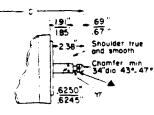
Threaded-shaft dimensions for General Electric 40-size TEFC motors as on NEMA 56J jetpump meters. ϕ
